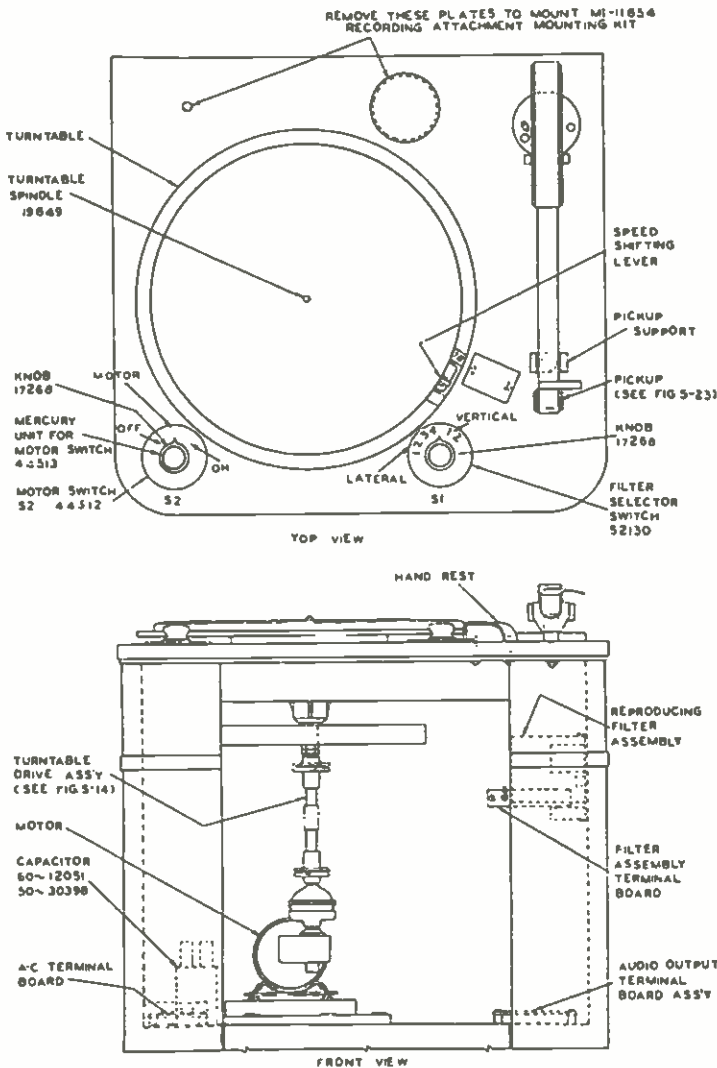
Top and front views of the RCA 70-C2 transcription turntable for reproducing both lateral- and vertical-cut records. A high-torque synchronous motor provides 78 and 33½ rpm turntable speeds. The pickup head is of the moving-conductor type with a diamond point stylus. The pickup and filter reproduce various types of records with a response characteristic considered an ideal playback response.
